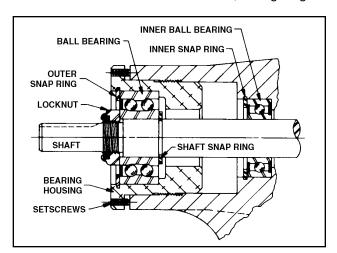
Thrust-Bearing assembly (GG, HJ, HL)
